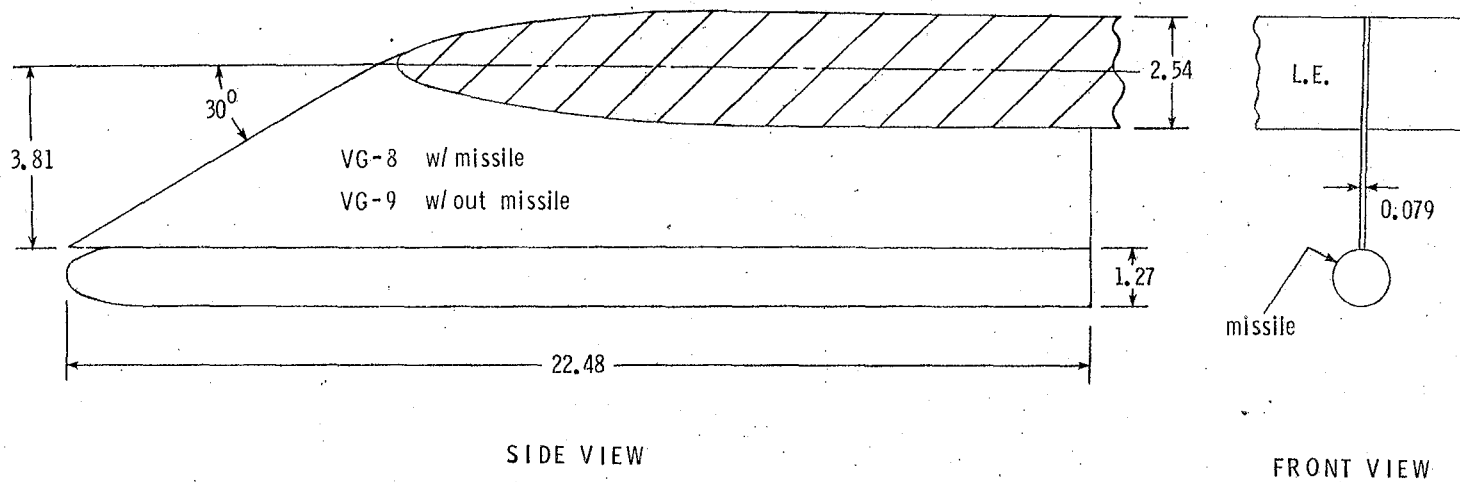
Drawing of pylon vortex generator with missile tested. Dimensions in centimeters.
